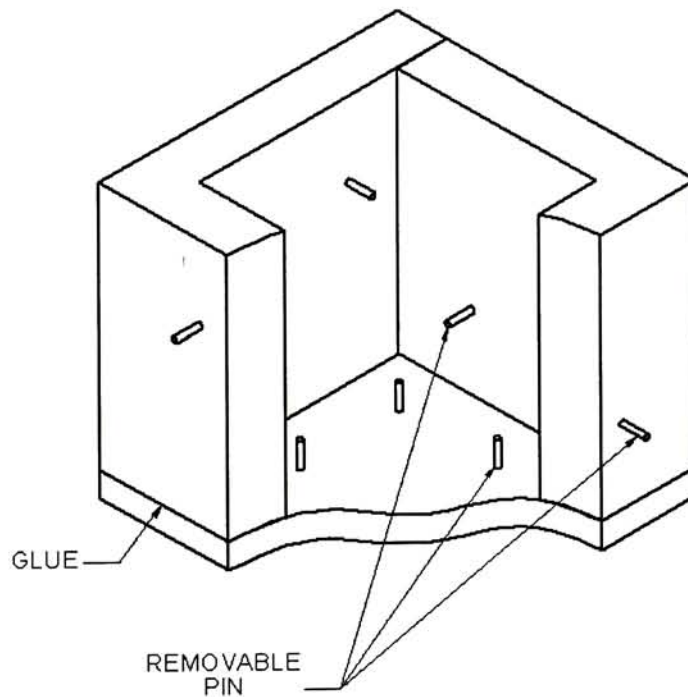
Cut-away view of a mold used for coated sample preparation
